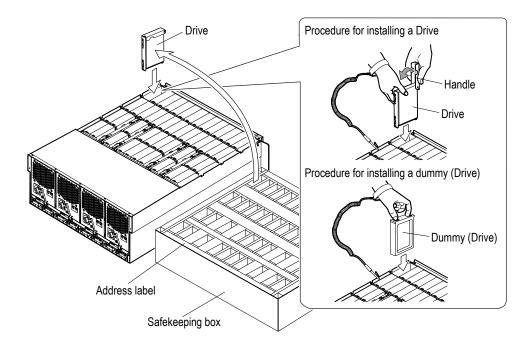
Installing the Drive/Dummy (Drive) (DBX)
